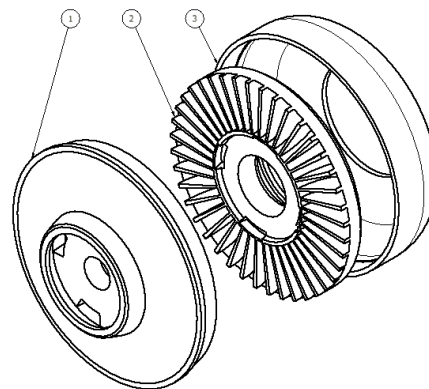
Hydrodynamic coupling assembly elements: 1 – pump wheel, 2 – turbine wheel, 3 – housing.
